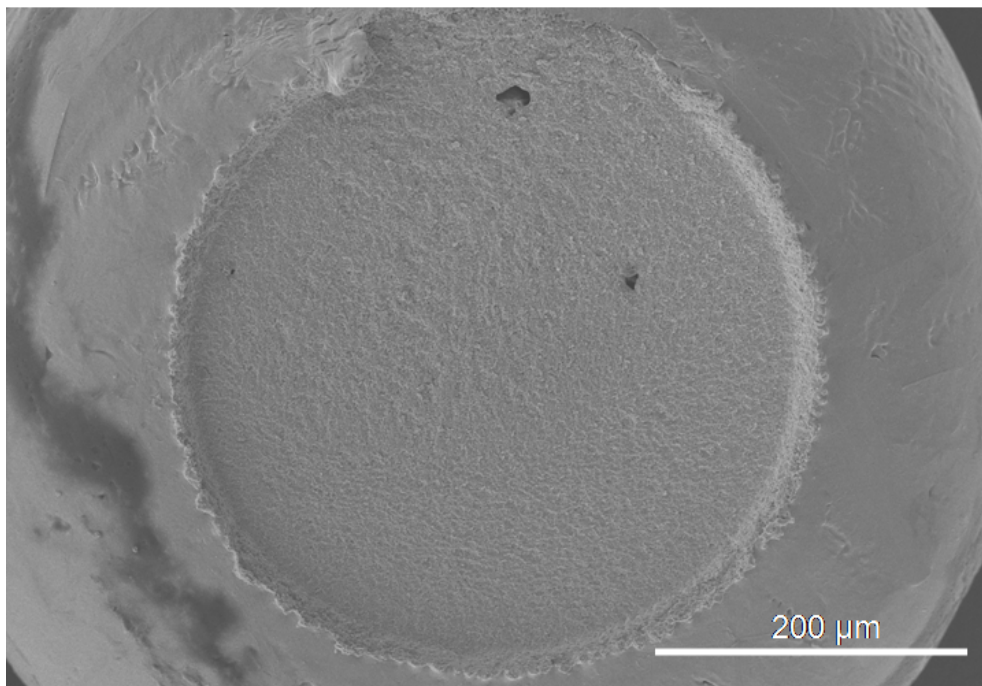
Sudden failure fracture surface seen in monotonic shear and tensile tests
